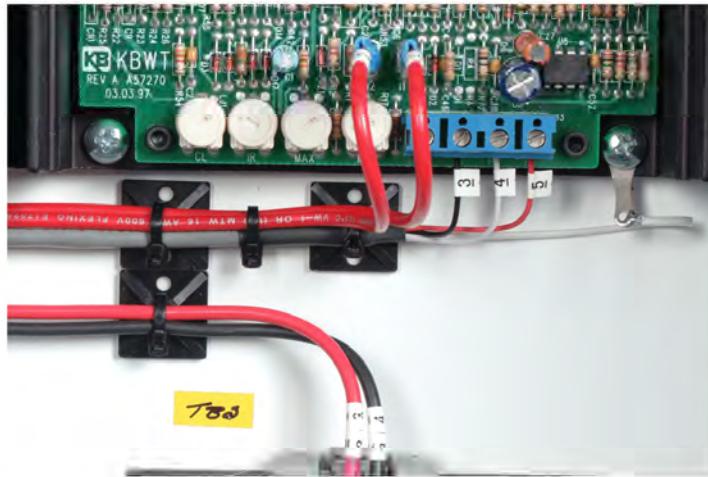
Connections of the shielded cable at the DC motor drive.
